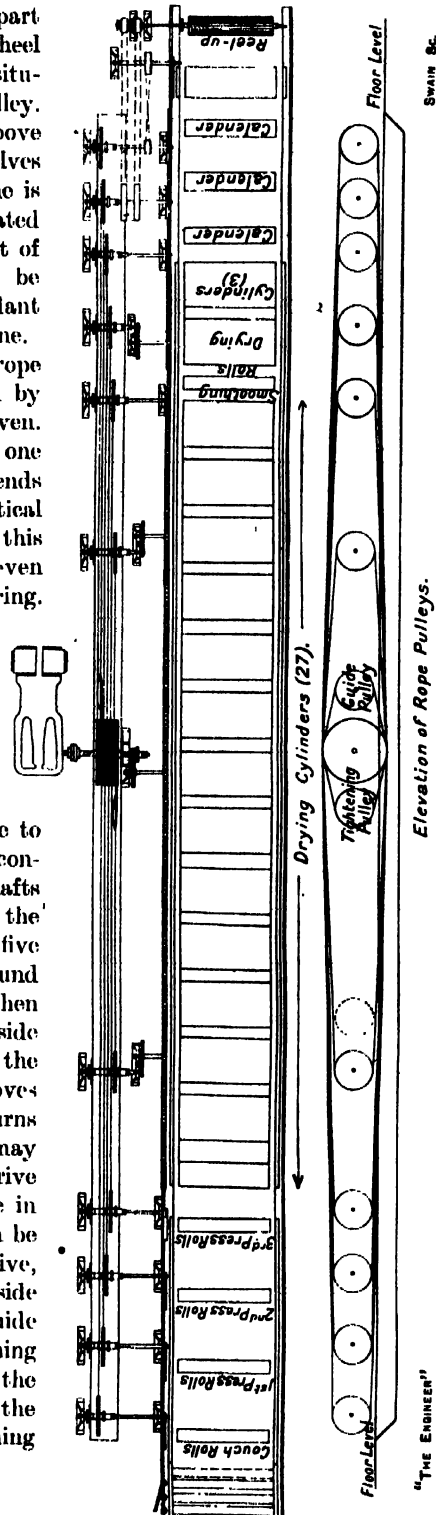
Bertrams' Expanding Pulley Rope Drive applied to a Large Machine.
